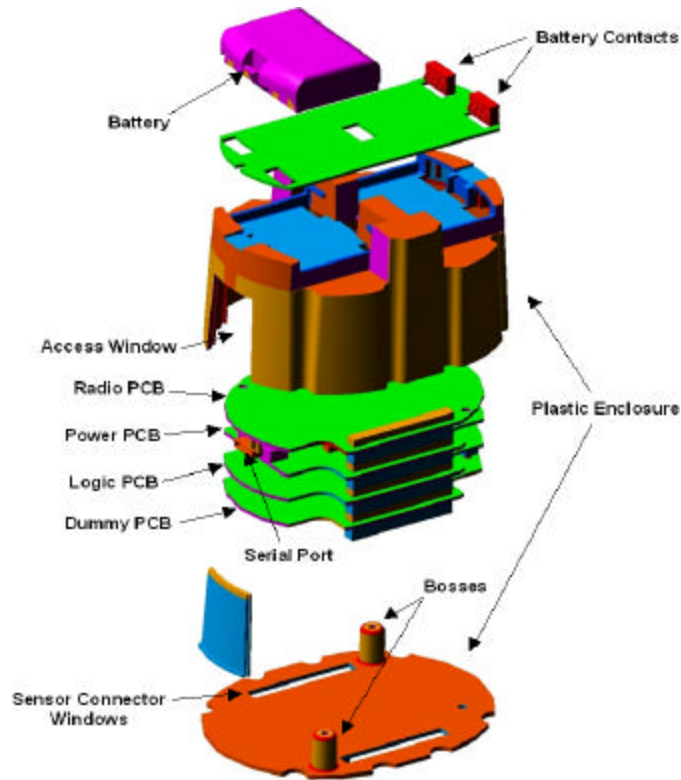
Exploded view of case with lid at bottom, to show battery socket area
